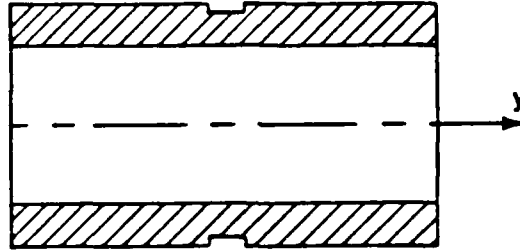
Specimen Geometry. (ref. Shawki et al. [16])
